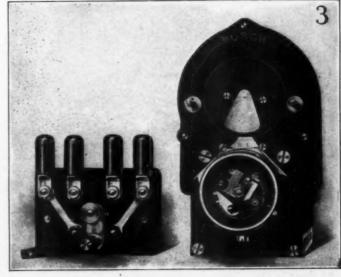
Details of Contact Breaker and Distributer of New Lowtension Magneto.
